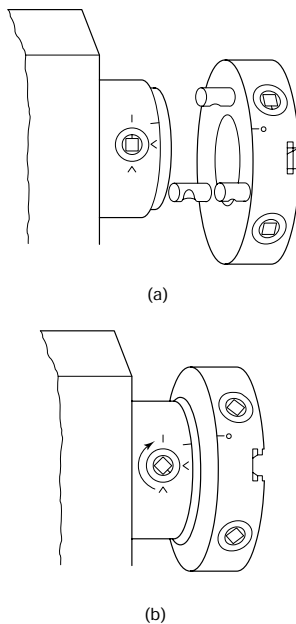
Cam lock spindle mounting: (a) locate pegs in holes on spindle nose; (b) turn clockwise to lock chuck
